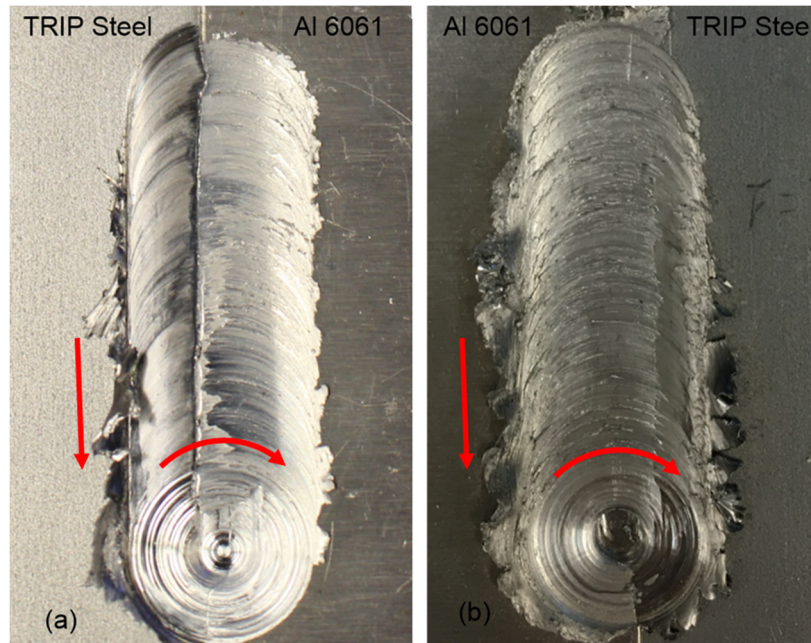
Weld top surface with steel placed at (a) Retreating side; (b) Advancing side
